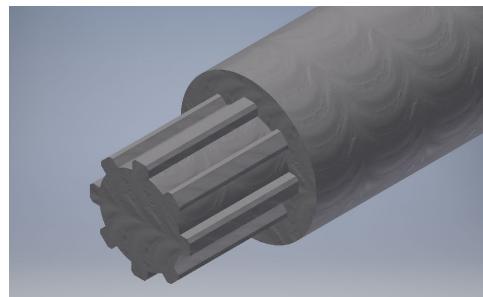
Shaft End having Sprocket Feature – Illustration (Mafokwane, et al.,2019).
